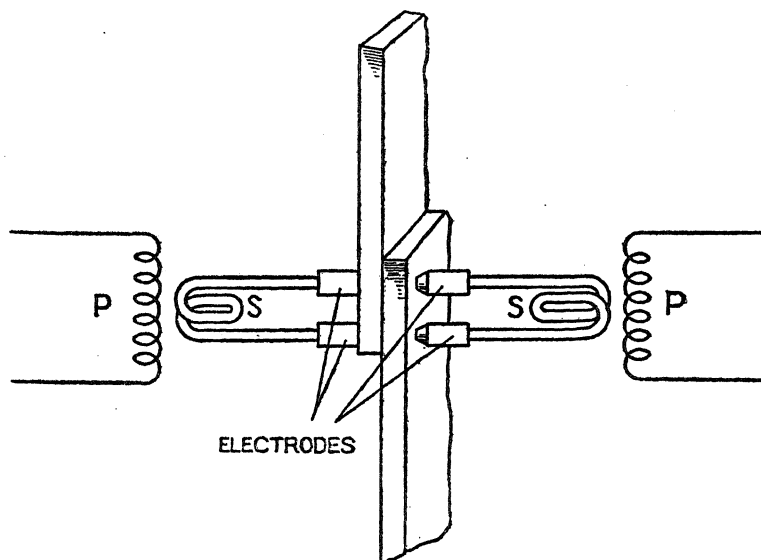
A Diagram to illustrate the Construction of a Double Spot Welder, in which two transformers P and S and two pair of electrodes are employed to produce sufficient heat at a junction of two overlapping iron plates to weld them together. This process replaces the old one of riveting.
